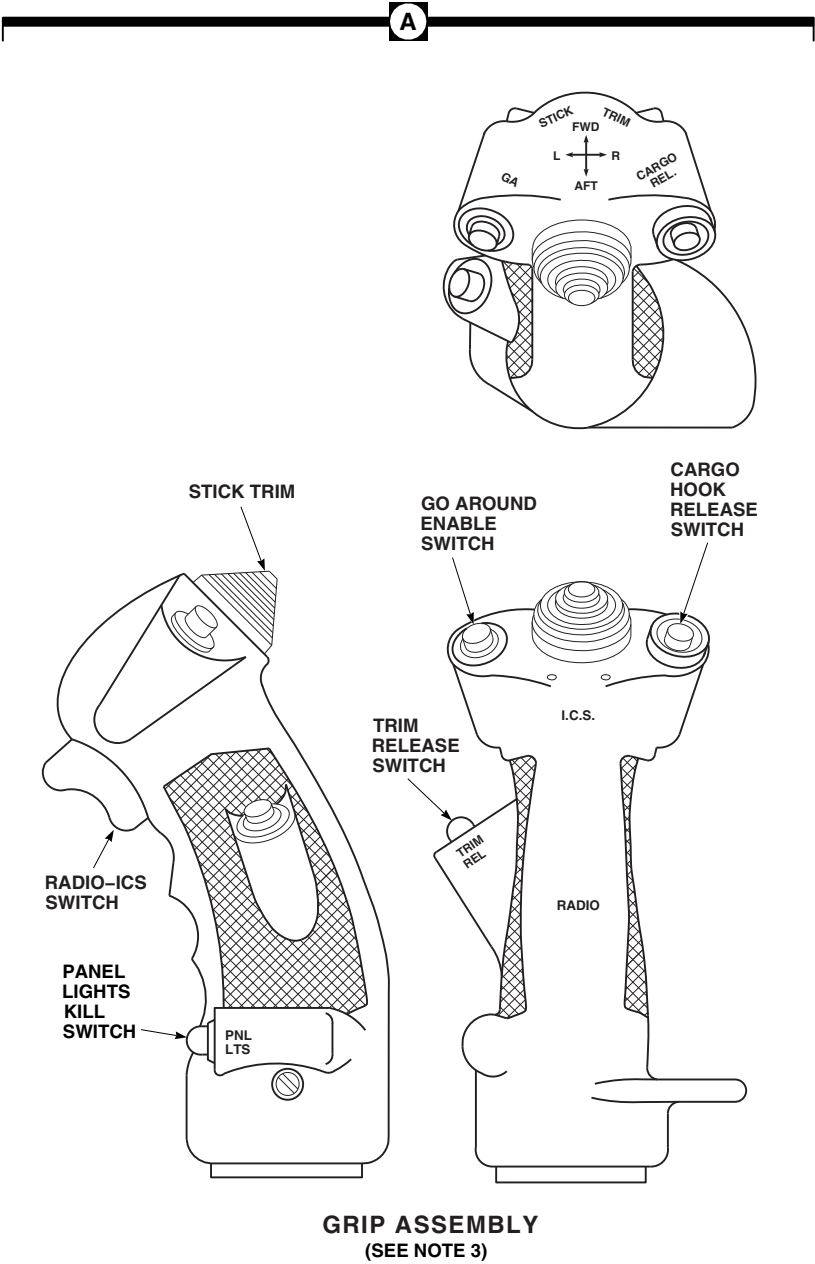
CYCLIC STICK ASSEMBLY (SHEET 1 OF 3)
